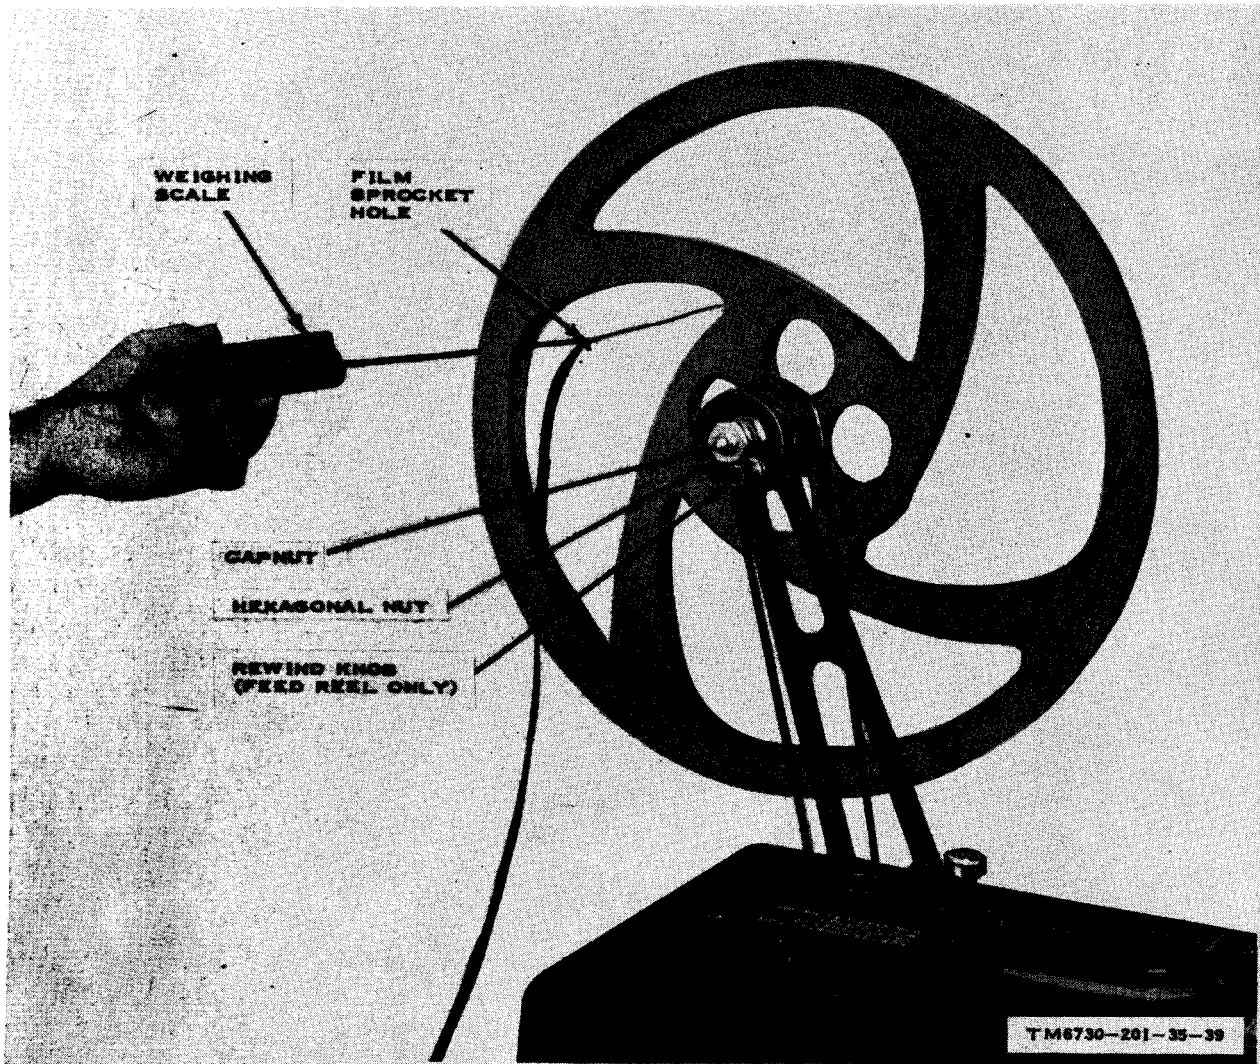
Adjustment takeup or feed reel arm friction clutch.
